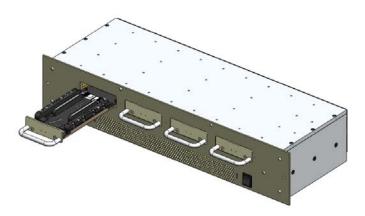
A single LRS-9550 shelf and four fixtures; one fixture partially removed
